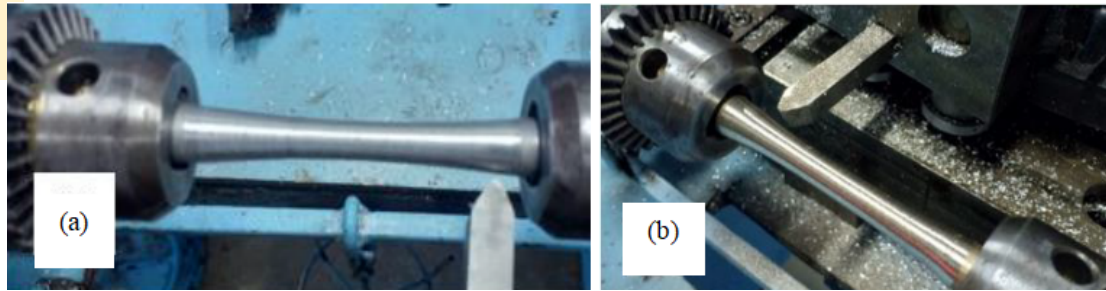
Specimen turning: (a) Brass, and (b) Aluminium
